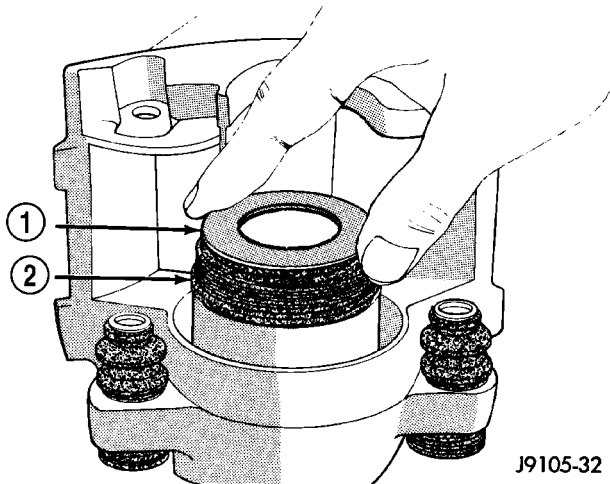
CALIPER PISTON INSTALLATION - TYPICAL
